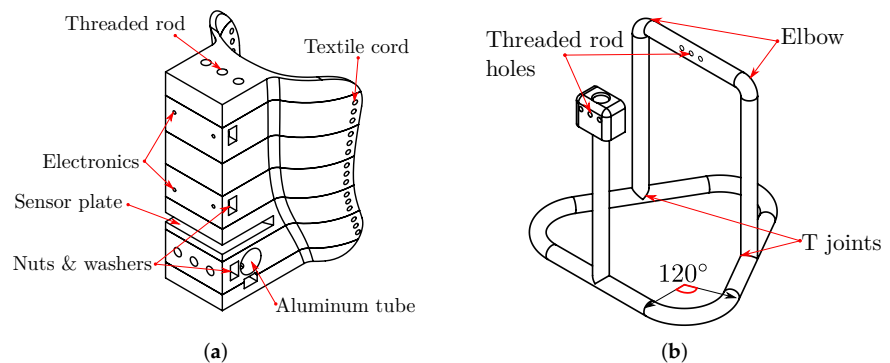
Mechanical attachment: (a) calf support, and (b) aluminum tube structure.
